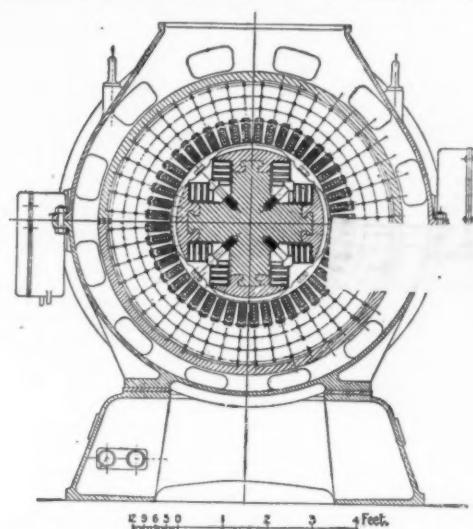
4,000-K.W. THREE-PHASE TURBO-ALTERNATOR, 6,000 VOLTS. (CROSS SECTION.)
